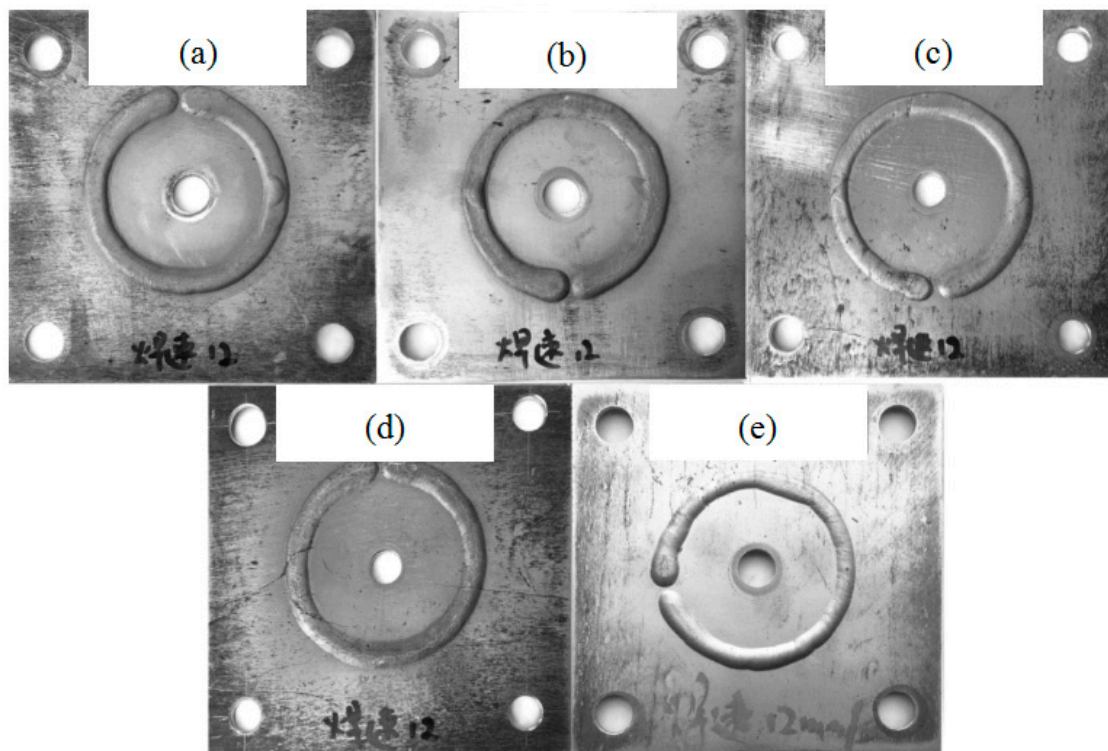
Representative images of post-weld workpieces: (a) Alloy 1, (b) Alloy 2, (c) Alloy 3, (d) Alloy 4, and (e) Alloy 5.
